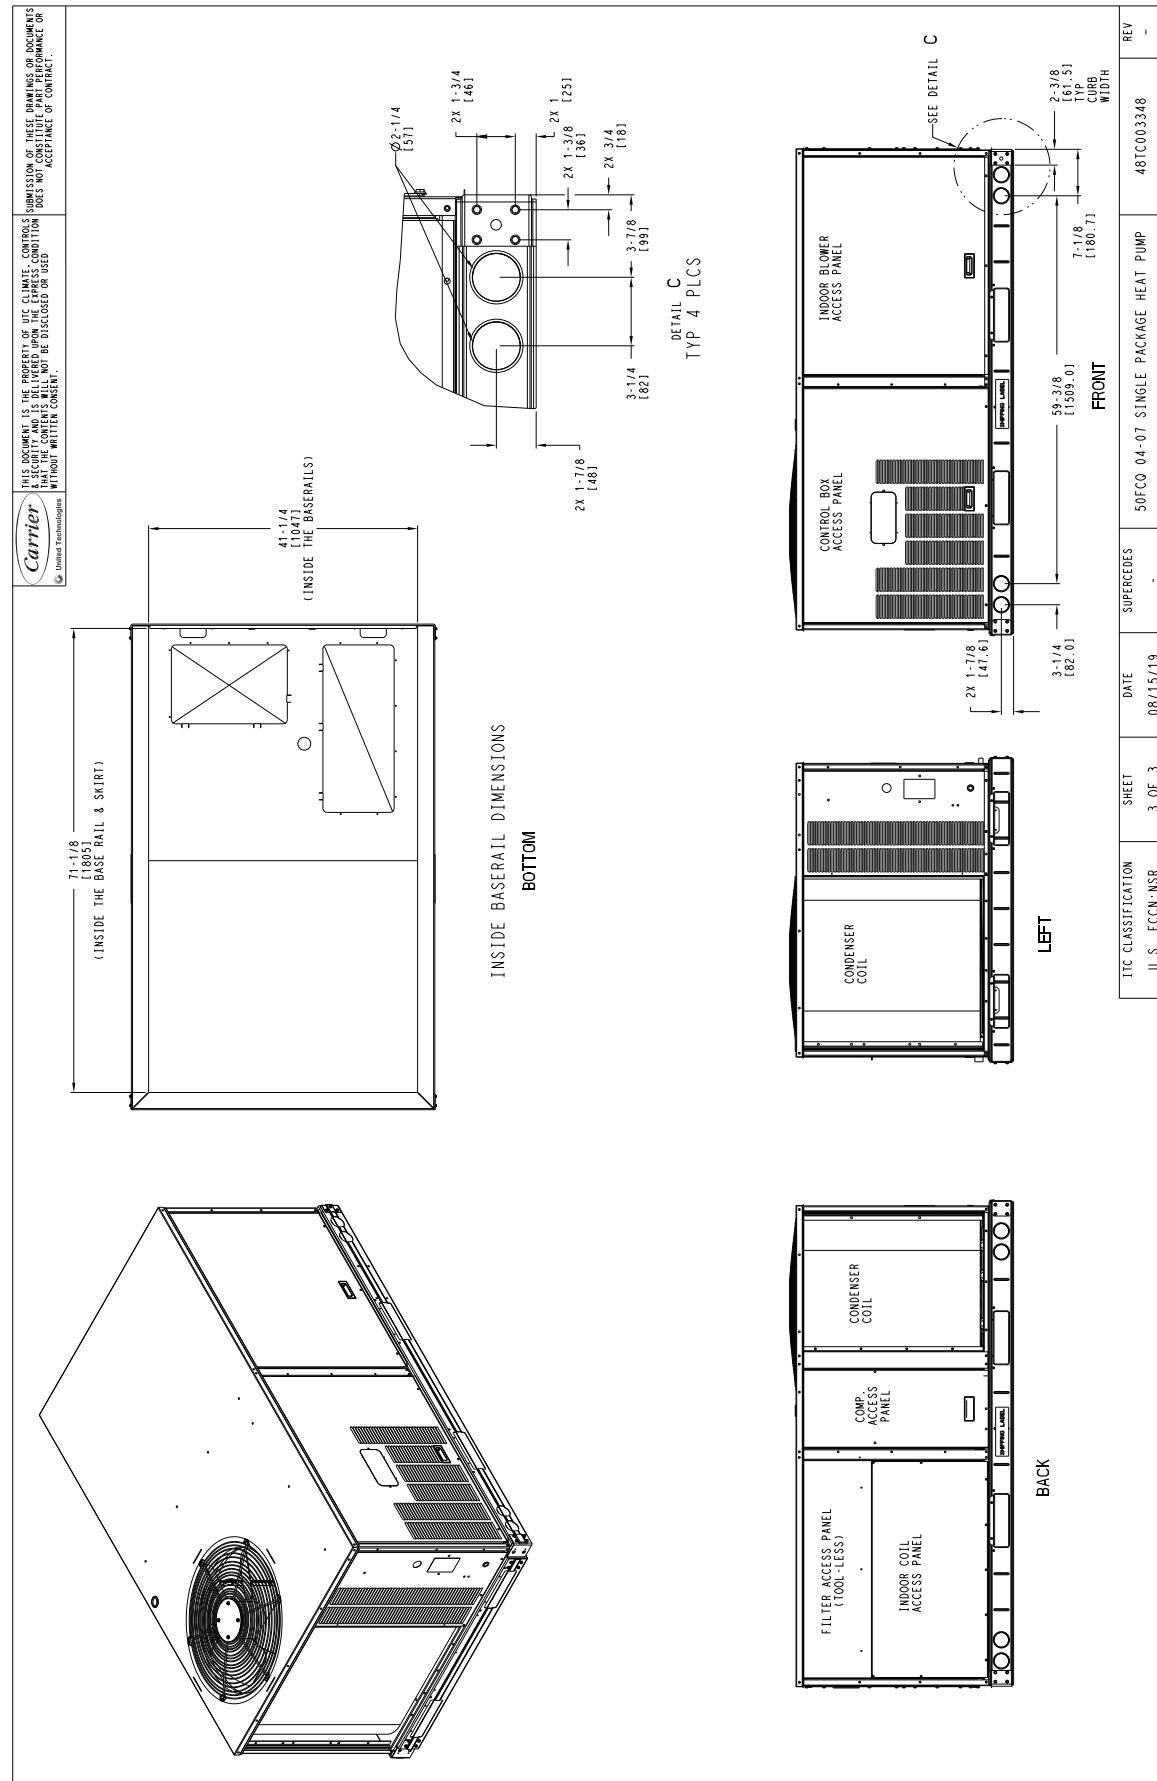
50FCQ*04-07 Dimensional Drawing (cont)
